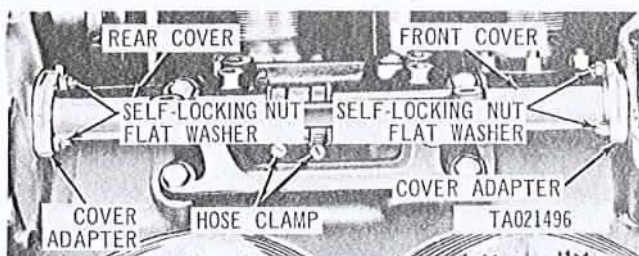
Disconnecting or connecting horizontal fan drive shaft front and rear cover adapters.
